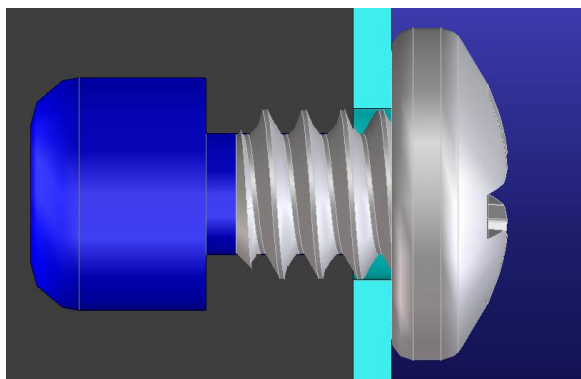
Option 2 – Side mount OEM hole, 6-32UNC X 1/8" (2.8 threads engagement)
